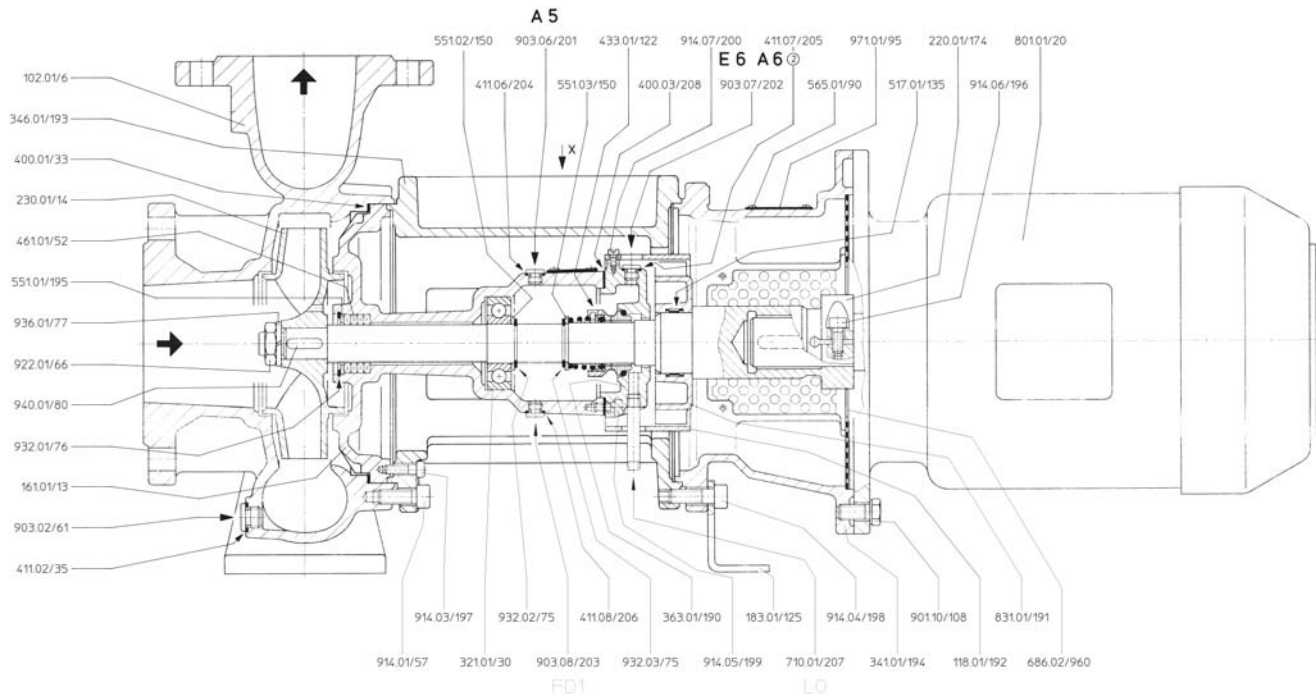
U5A - Unbalanced mechanical seal, with safety stuffing box
